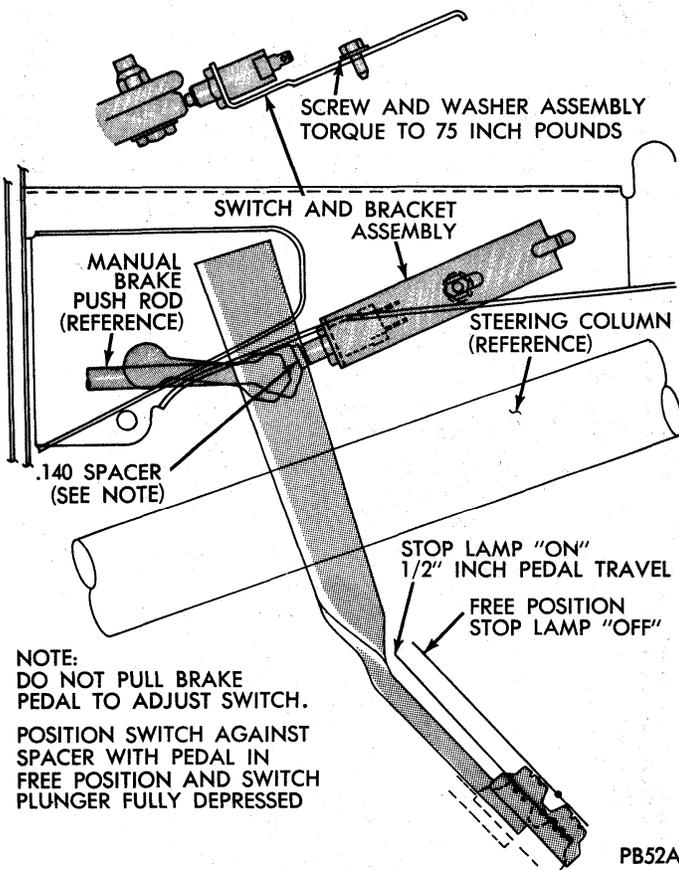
Stop Lamp Switch Adjustment (H,N,R,W,S and X Models)
